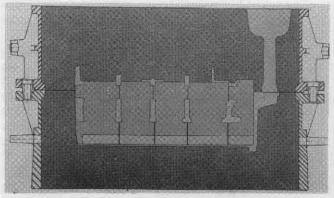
Longitudinal cross-section through cylinder-block mold
